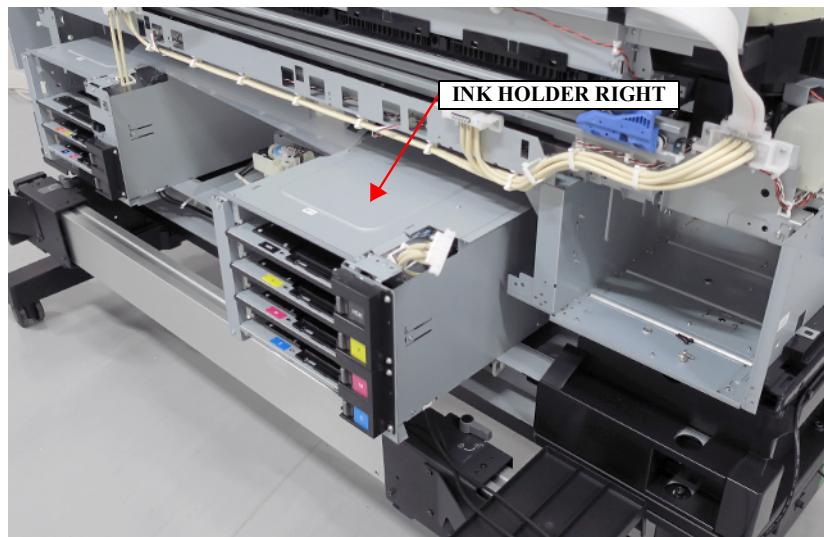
Removing the PE SENSOR (THICK PAPER) (1)
